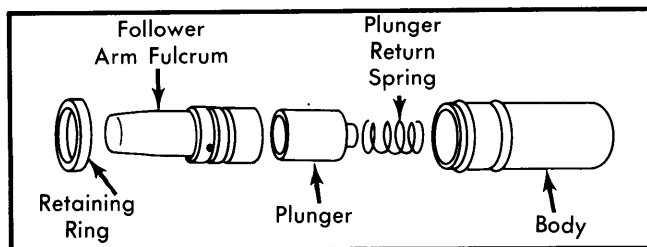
Exploded View of Hydraulic Lifter Assembly
